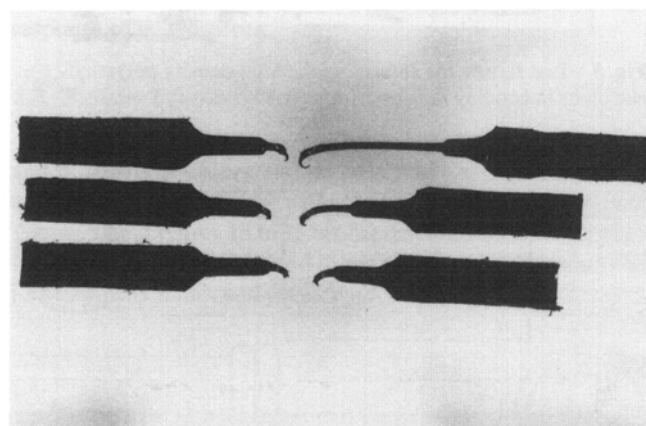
Failure locations for the tensile test specimens of the plain unwelded pipe
